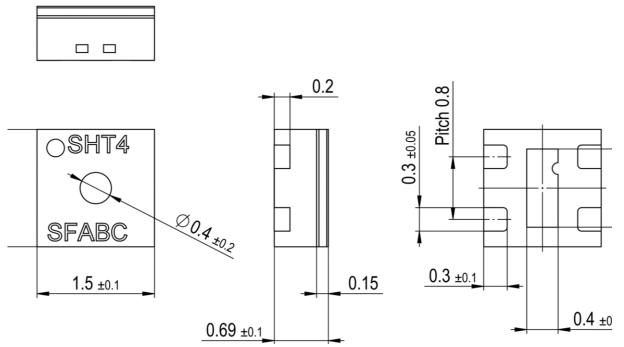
Dimensional drawing of SHT4x with filter membrane including package tolerances (units mm)
